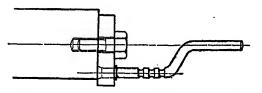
A Method of Fitting Indicator Gear Crank to Engine Crank Shaft.
